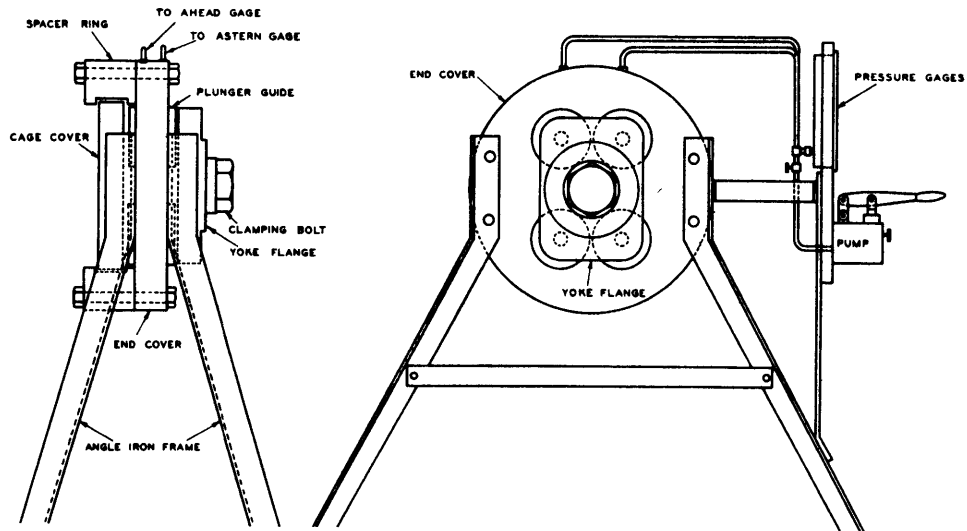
Sketch showing general assembly and arrangement of thrustmeter support for calibration.
